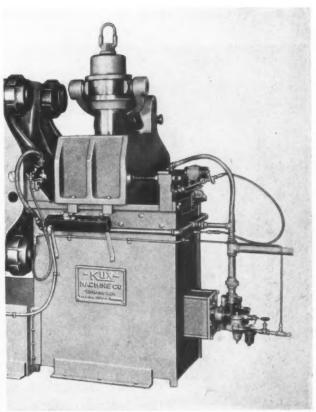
View Showing Self-contained Melting Pot and Furnace on Gooseneck Plunger Type Die-casting Machine
